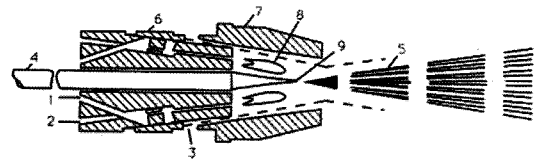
Sketch of flame spraying of wire/rods⁽⁶⁾; 1. oxygen; 2. fuel gas; 3. compressed air; 4. wire/rod; 5. stream of molten droplets; 6. working gas nozzle; 7. compressed air cap; 8. flame; 9. wire molten
